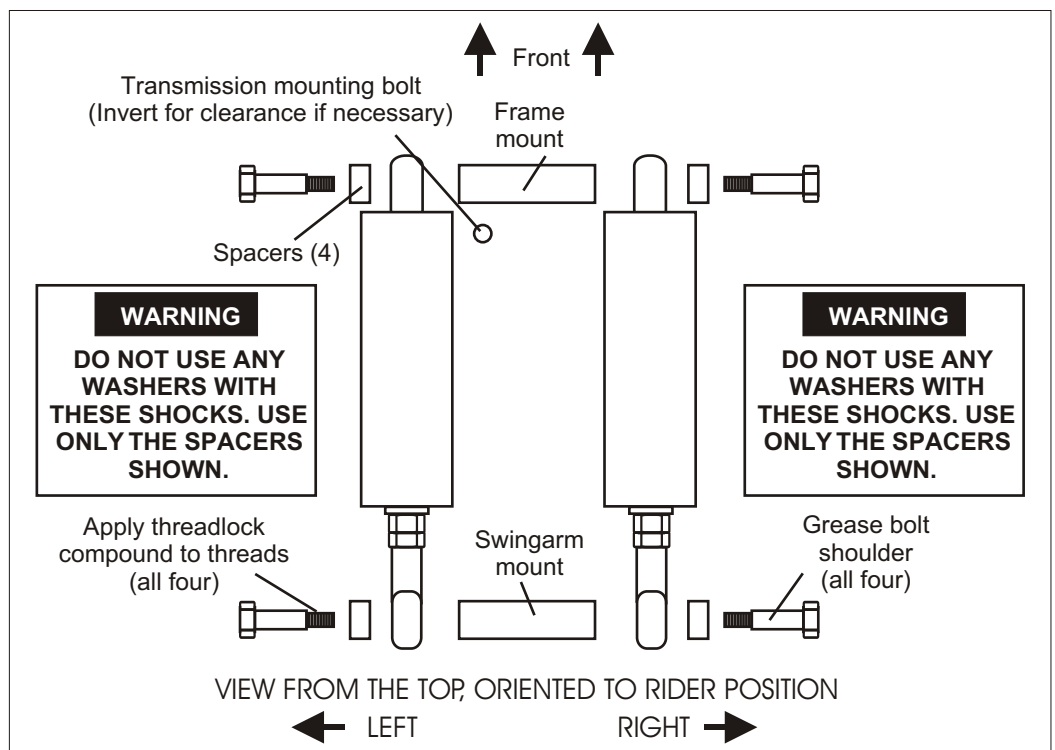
Shock mounting locations as viewed from the top of the motorcycle. Use only the factory mounting bolts. Do not use any washers with the supplied spacers.
